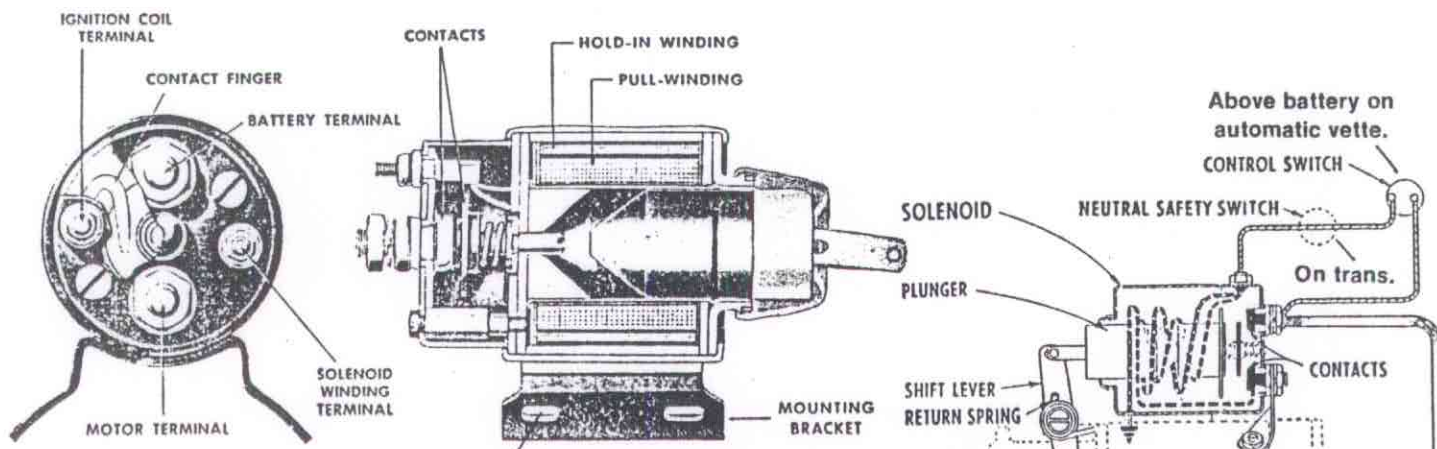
End and sectional views of a typical solenoid switch. The additional terminal and contact finger are used on 12-volt passenger car applications
